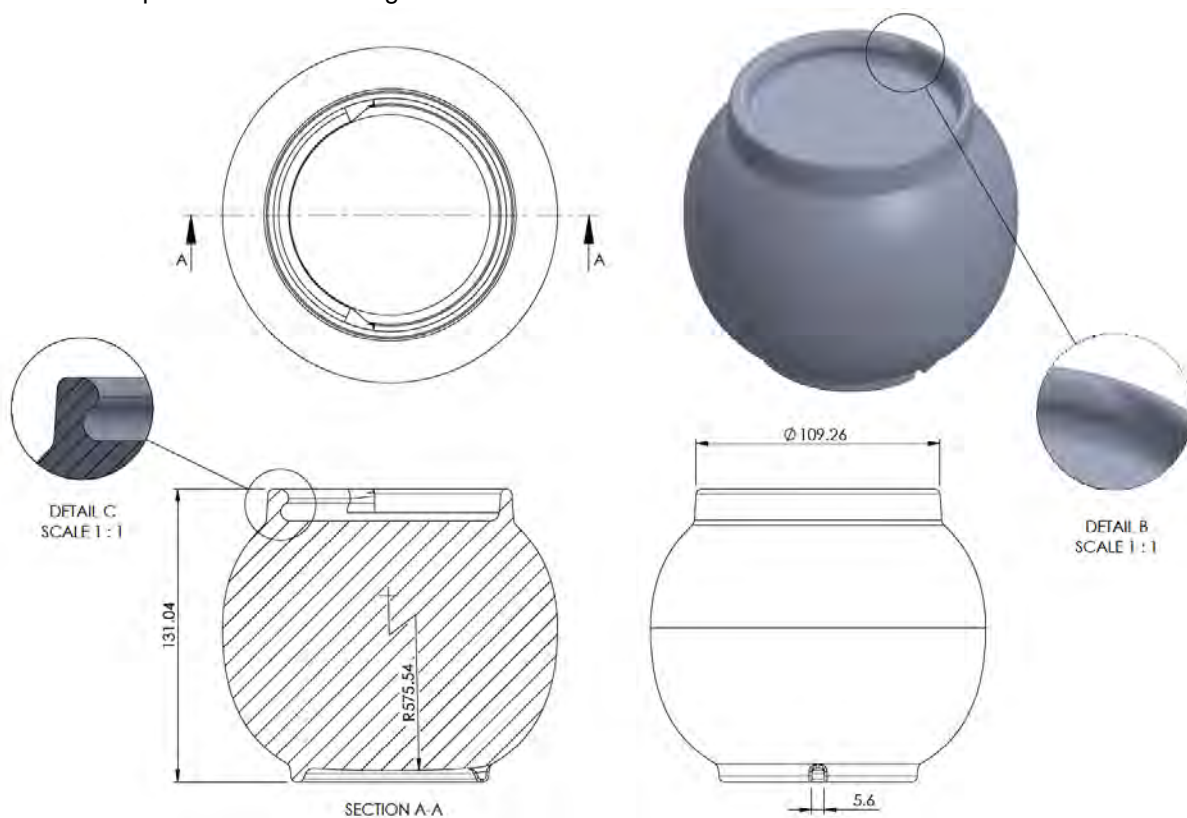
CAD drawing of globe shape and lock lid detail used to test the principal of the locking lid and later to be printed and taken to Ed Bentley in order to explore if the shape could be feasibly moulded.
